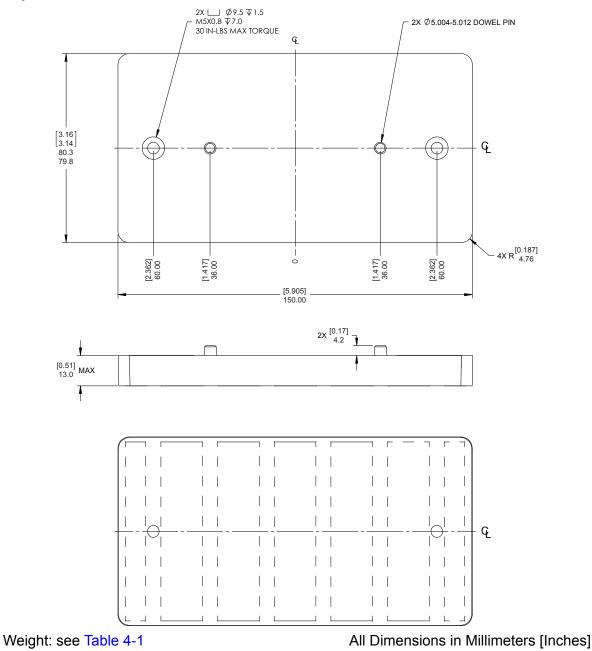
Standard 'F' Potted Magnet Array Mechanical Drawing
